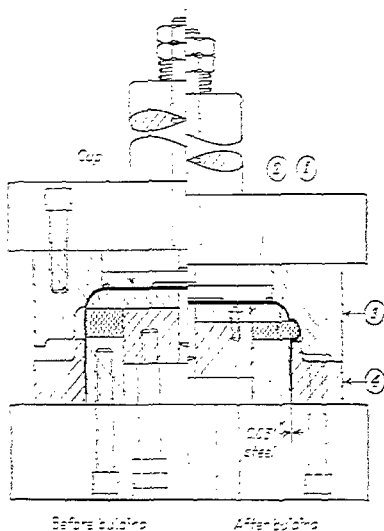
Bulging die for exhaust-valve cover. (Herc. Mfg. Corp.)
